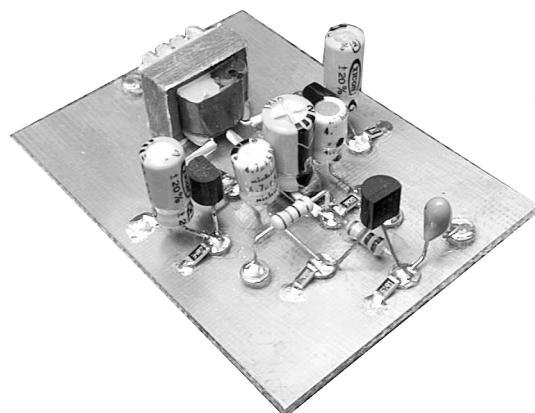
E — The completed homebrew Audio Amp assembly shows simple, effective use of SMT components used together with conventional leaded components when constructed “Manhattan-style.”
